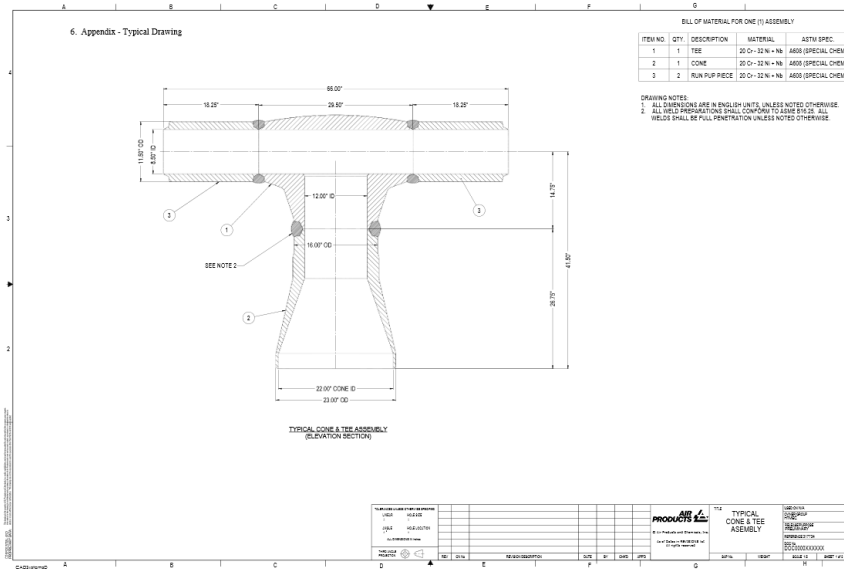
Parts idagram of Cone & Tee Assembly Model
